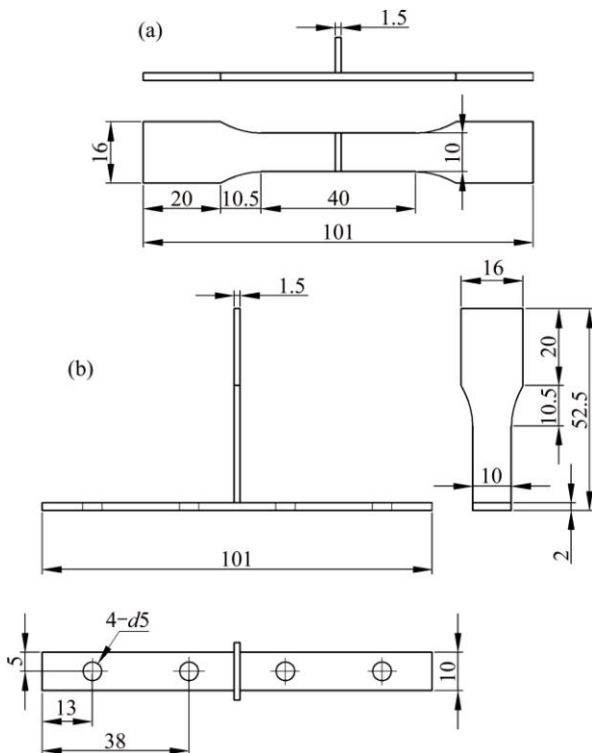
Schematic illustration of tensile specimens in dimensions with different directions: (a) Along skin; (b) Along stringer (unit: mm)
